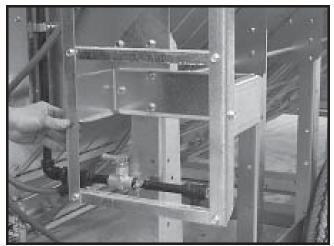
Ladder assembly bolted to lower ladder bracket.
